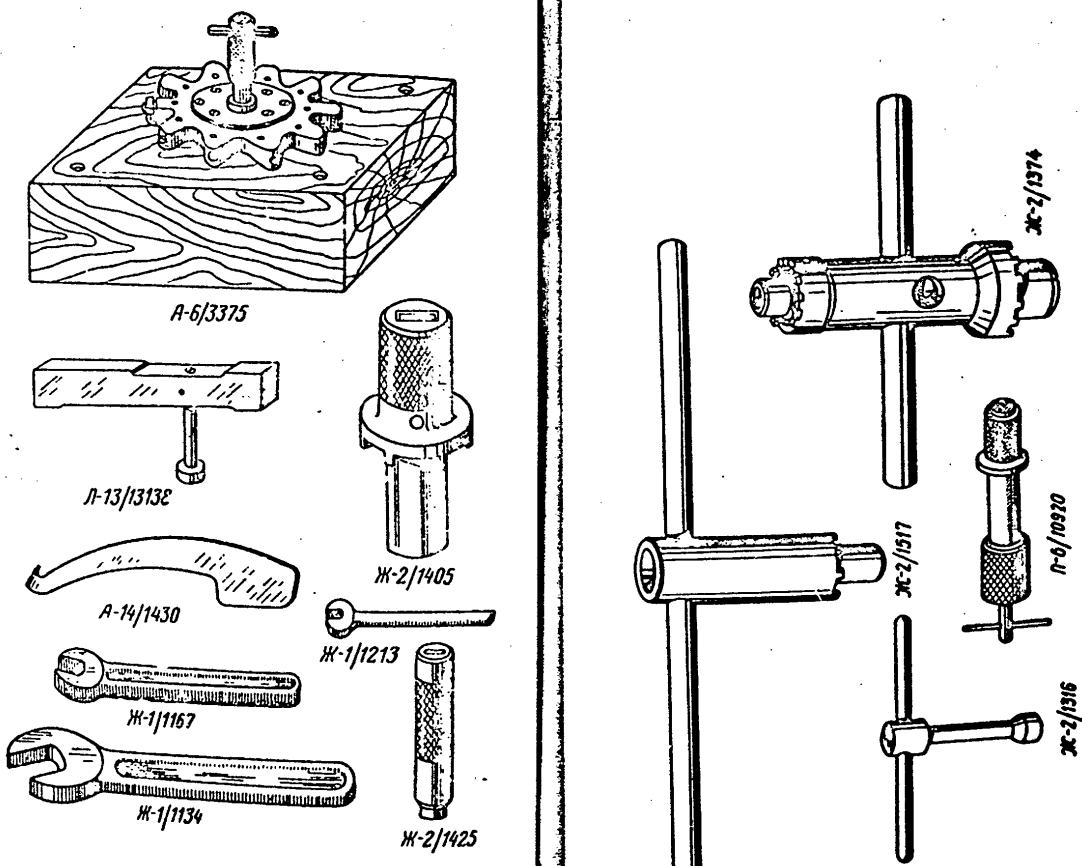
TOOLS AND FIXTURES FOR SUPERCHARGER ASSEMBLY
